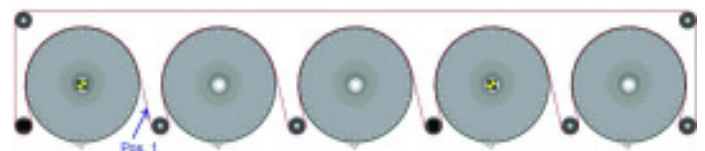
Upper felt of the model dryer group with 'silent dryer drive'
